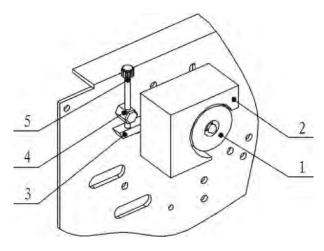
(1) Ink Roller, (2) Ink Roller Heating Block, (3) Swing Pole, (4) Adjusting Strut, (5) Ink Wheel Adjusting Device
